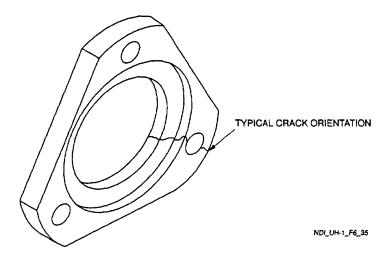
Tail Rotor Control Tube and Quill - Bearing Retainer.
